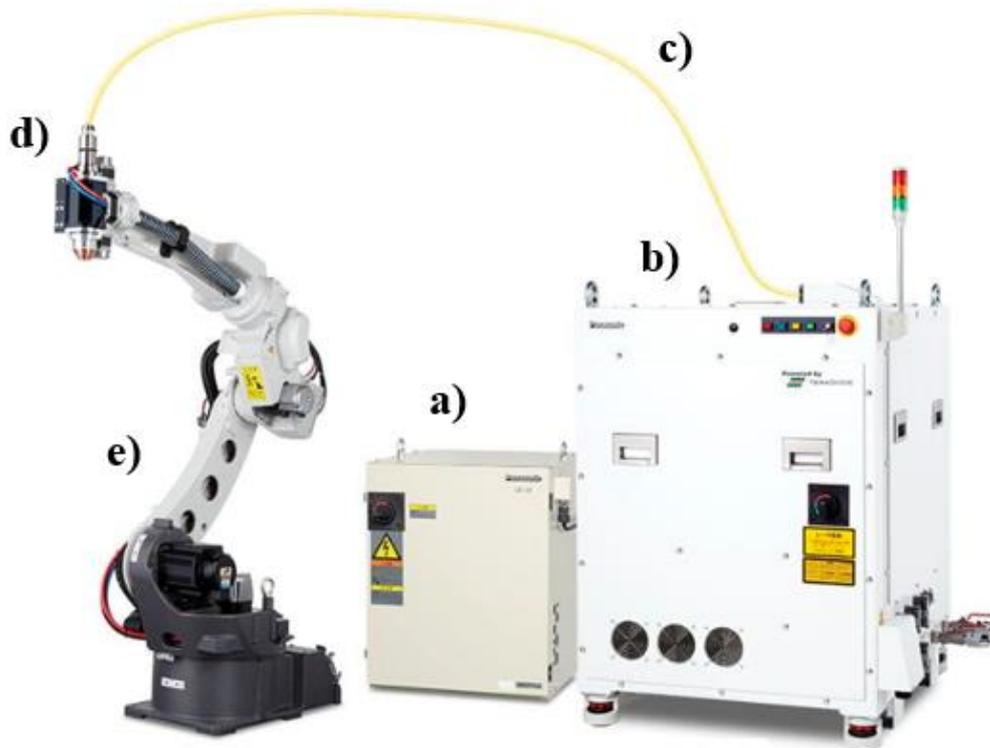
Typical laser welding system in automotive industry (Mod. Directindustry, Nd).
